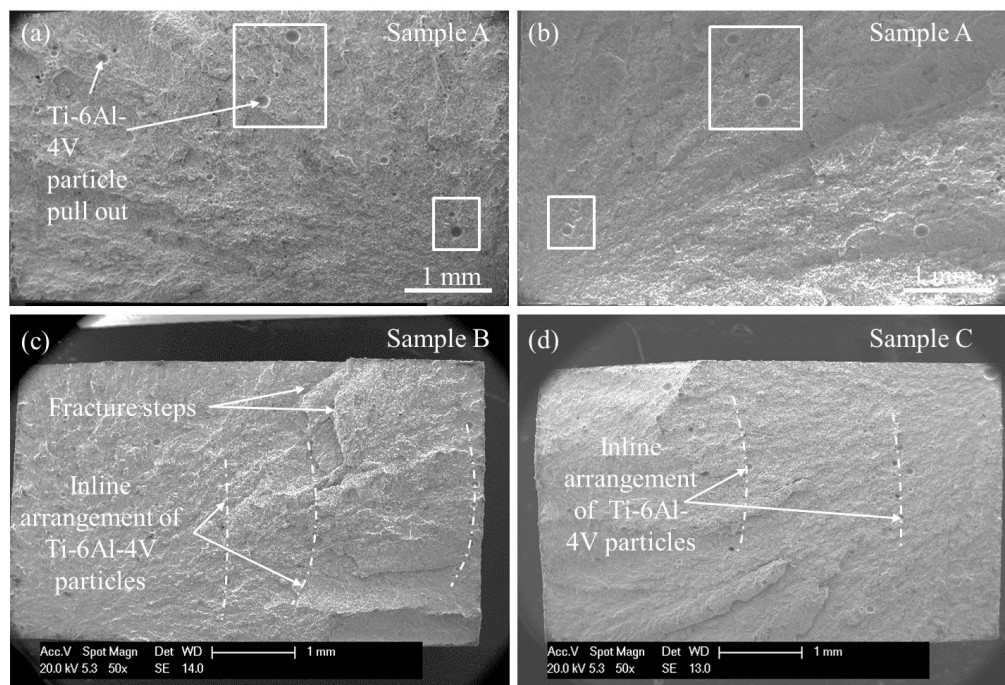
SE images of the fractured tensile test piece surfaces of the laser clad TiB₂/Ti-6Al-4V composite.
